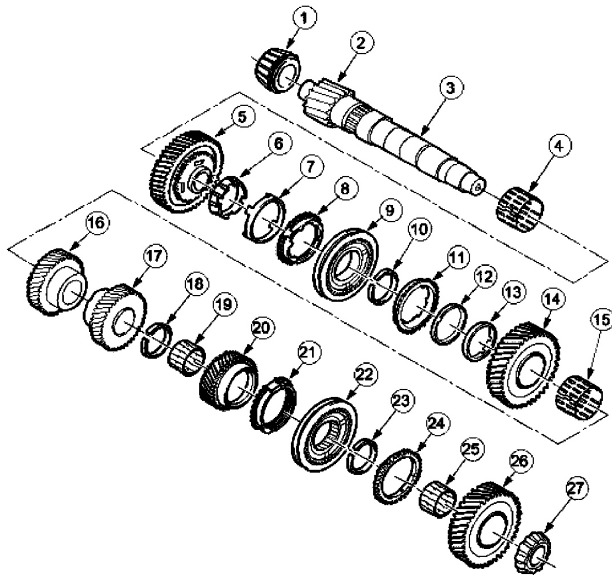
Identifying First And Second Gear Output Shaft Components Description - Vehicles Built Up To 07/2000
